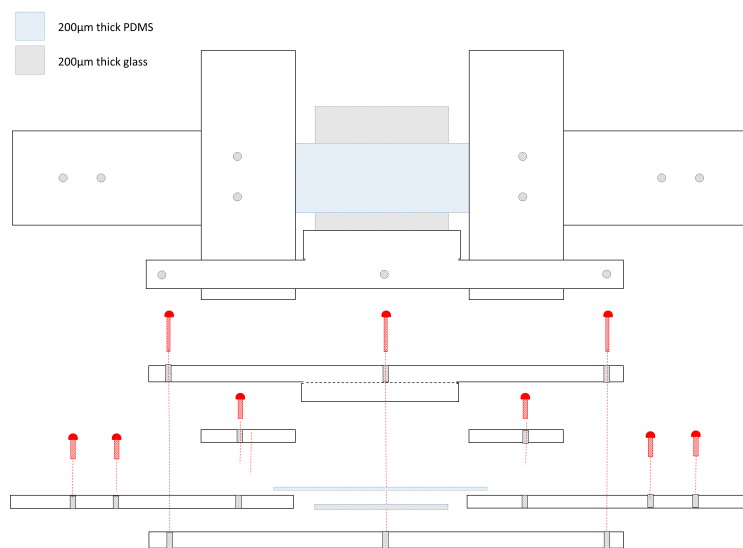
The motor clamps and glass clamp assembled in the configuration used during AFM imaging. Below is a side-view of the assembled piece.
